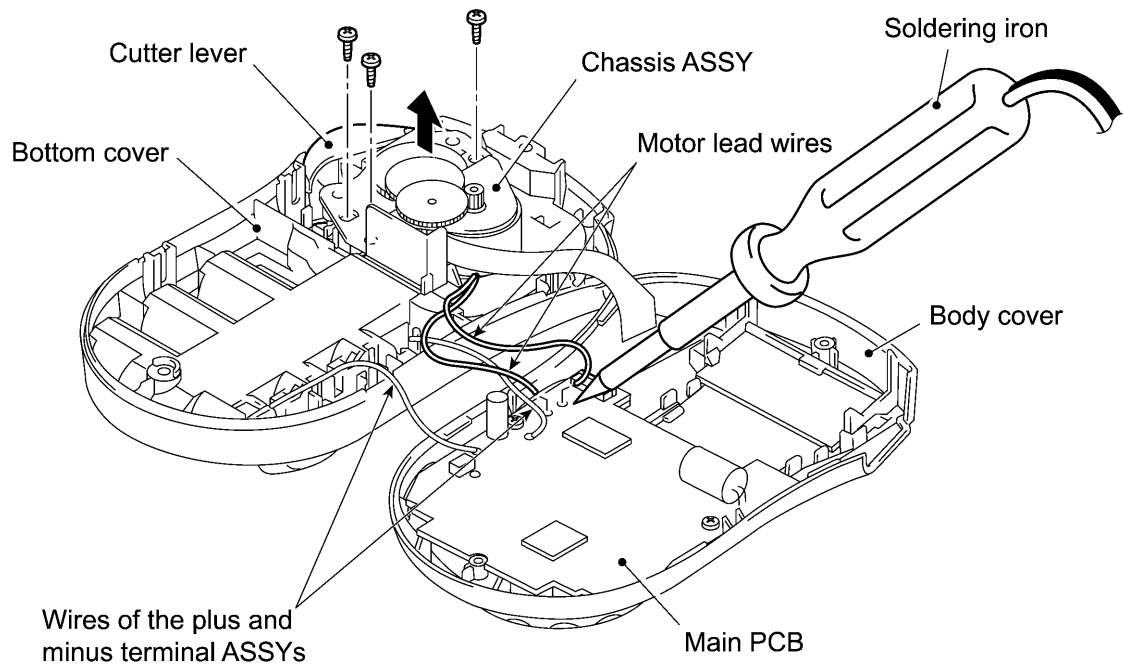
Unsoldering the Motor Lead Wires and Removing the Chassis ASSY
